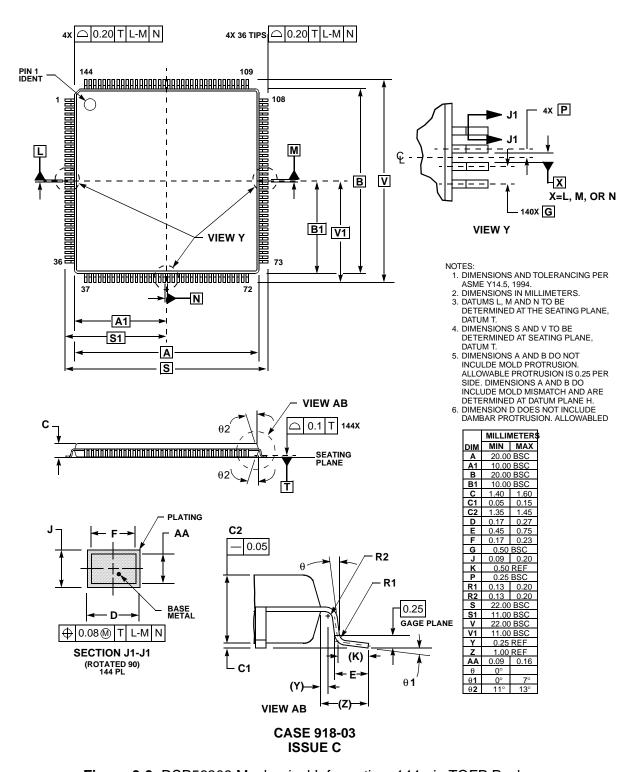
DSP56309 Mechanical Information, 144-pin TQFP Package
